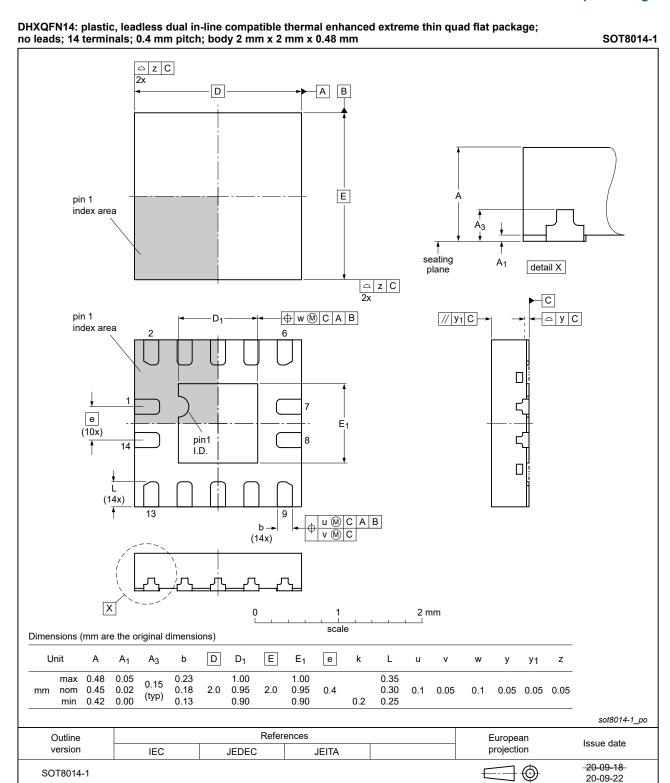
Package outline SOT8014-1 (DHXQFN14)
